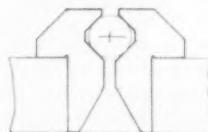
Such operations as milling bar ends to length and machining steps or grooves are effectively handled by these simple jaws
